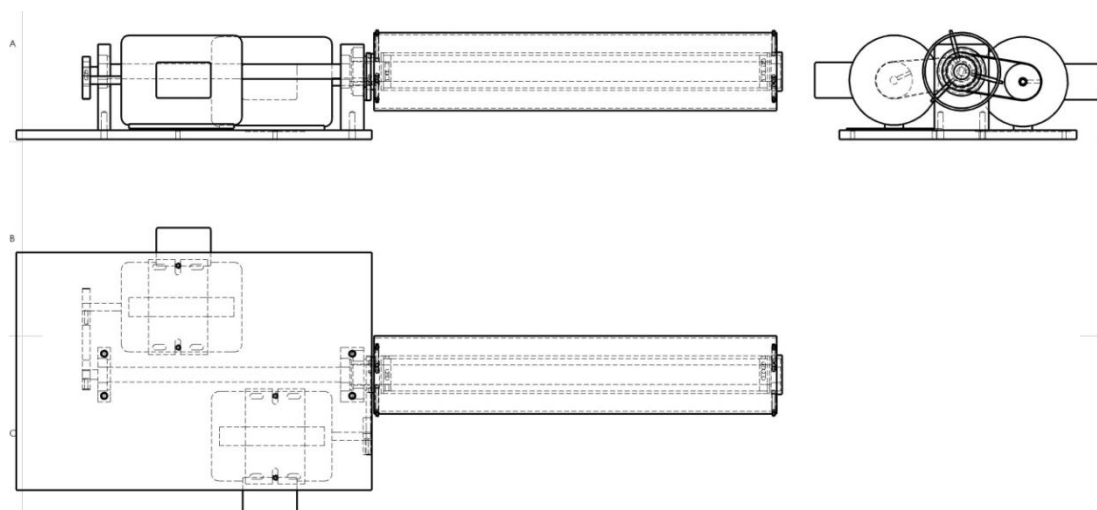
Final design of concentric cylinders showing the mid bearing and the shaft.
